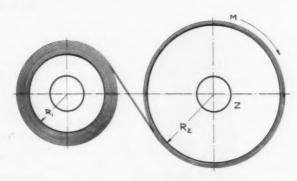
FIG. I—Clockwise torque is exerted on spindle "Z" as the spring unwinds onto the smaller spool.
